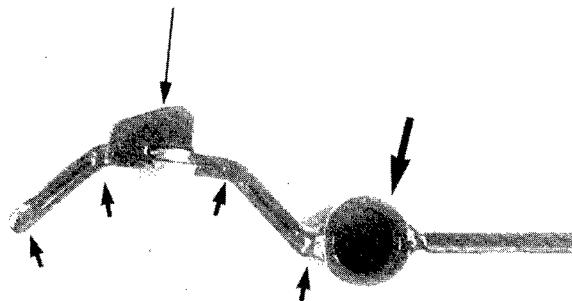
Overall view of a new pawl. Small arrows are pointing to the welded spots; the long thin arrow is showing the weight and the thick arrow is showing the fulcrum bushing. Mag. 0.6X
